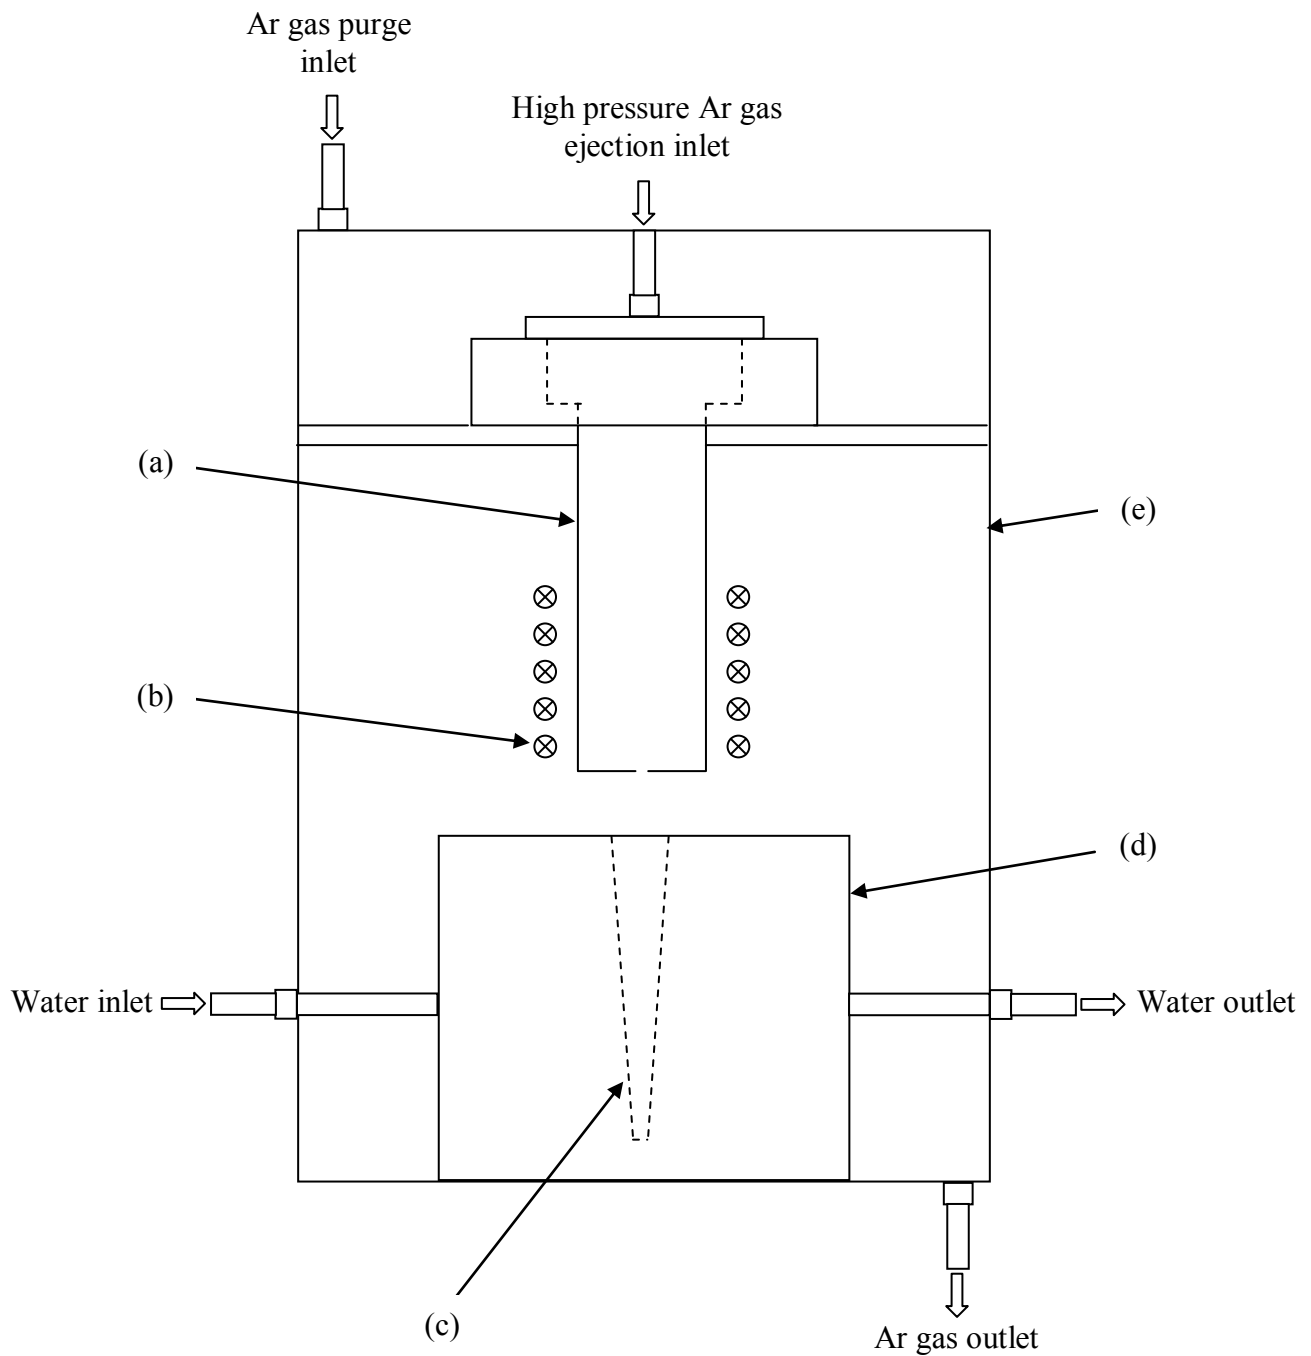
Schematic diagram of casting apparatus: (a) mild steel crucible, (b) induction coil, (c) wedge-shaped cavity, (d) water cooled Cu-mould and (e) chamber wall.
